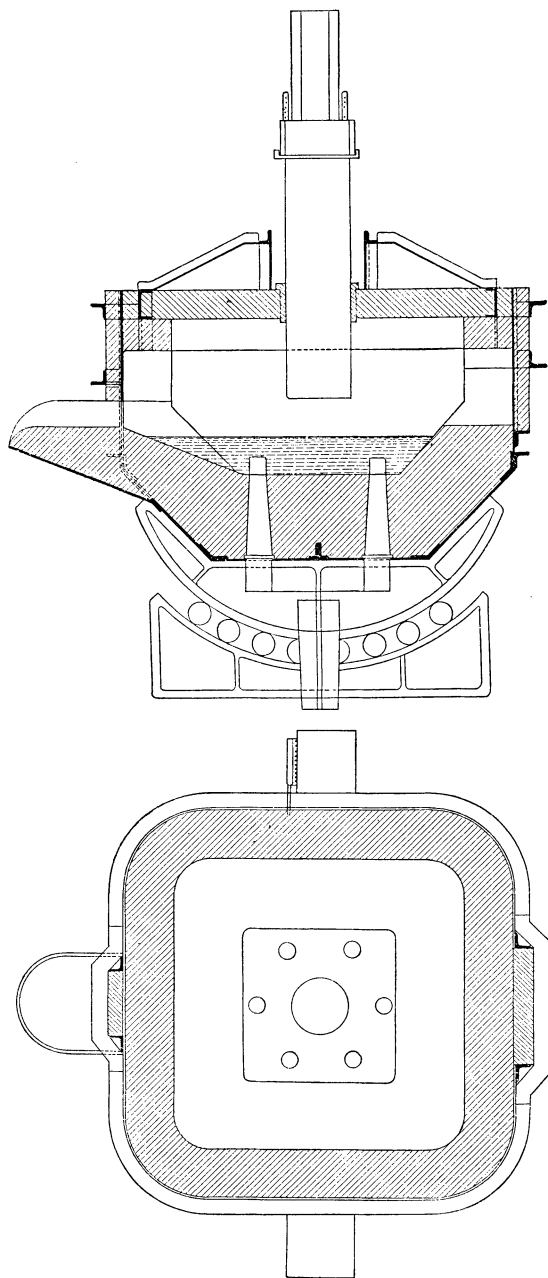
Plan and elevation of 2.5 to 3 ton, single-phase Girod steel furnace, Ugine, France.
